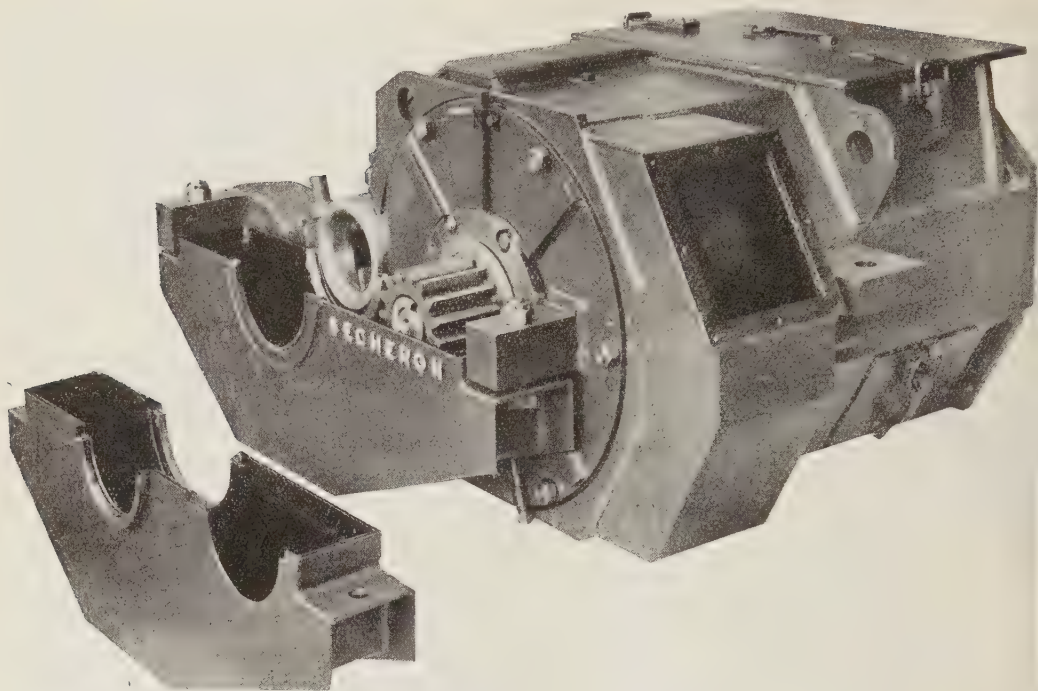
200-H.P. motor, with completely welded frame.
